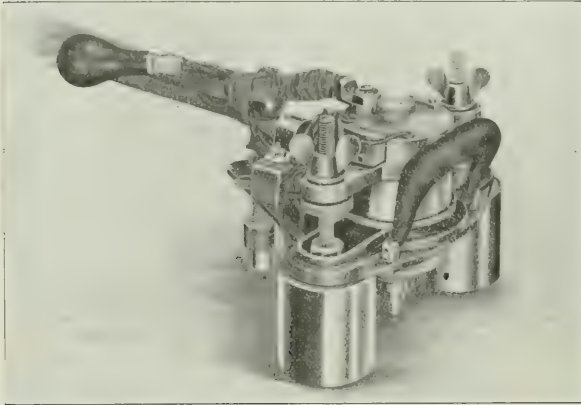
THE CYC-ARC WELDING TOOL.
